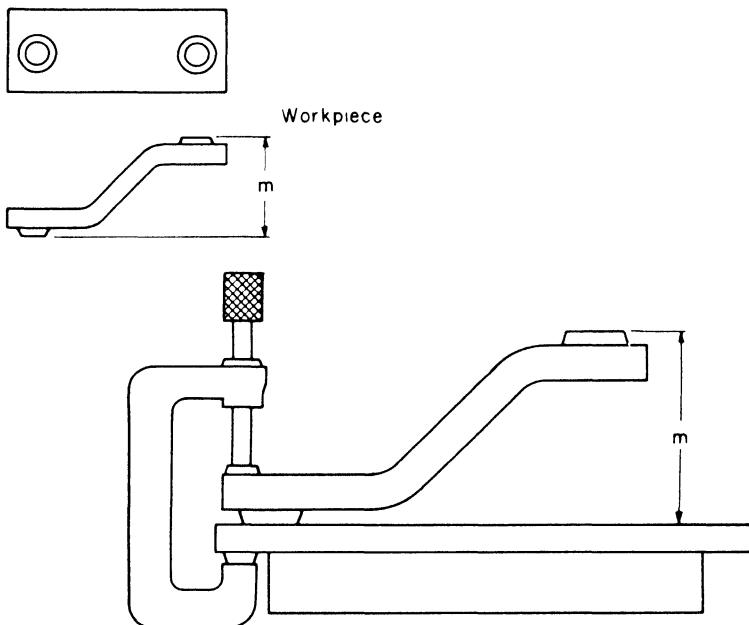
Dimension *m* is easily measured if one leg of the S-shaped work-piece is clamped against a surface plate.
